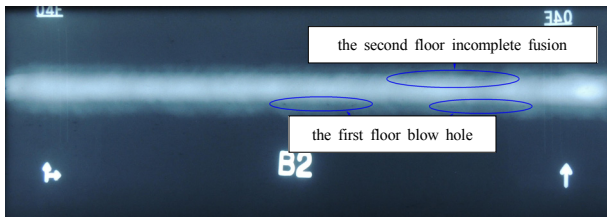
X-ray Radiographic test film of welding specimen at CO₂ 100% in 15 L/min
